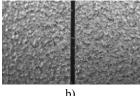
Photographs of samples during CO₂ laser cutting of high alloyed steel 1.4828
